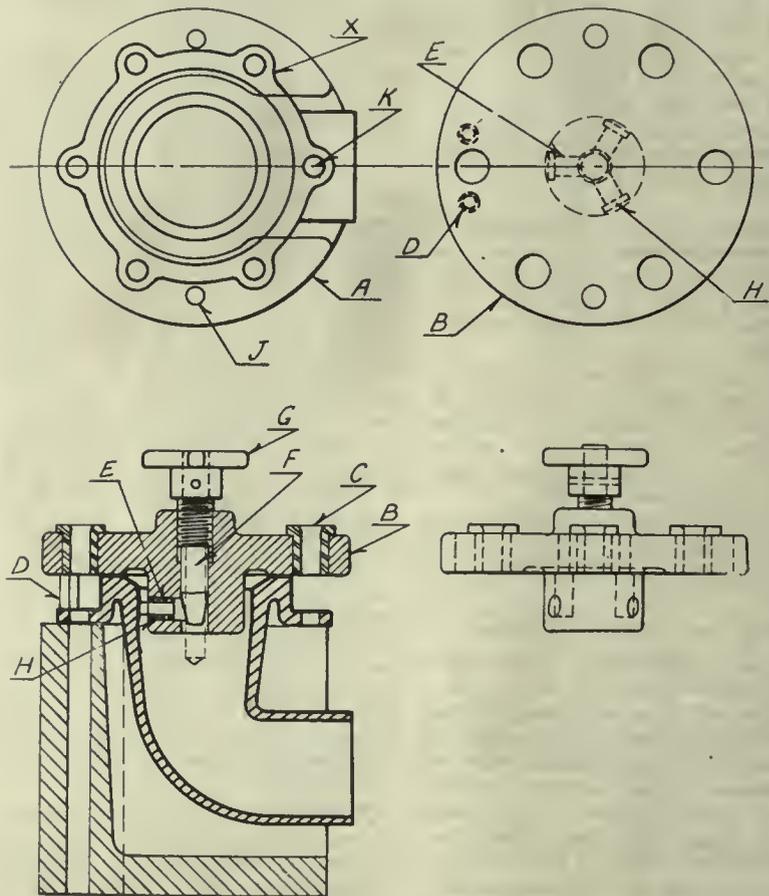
ILLUSTRATING THE DRILLING FIXTURE.
